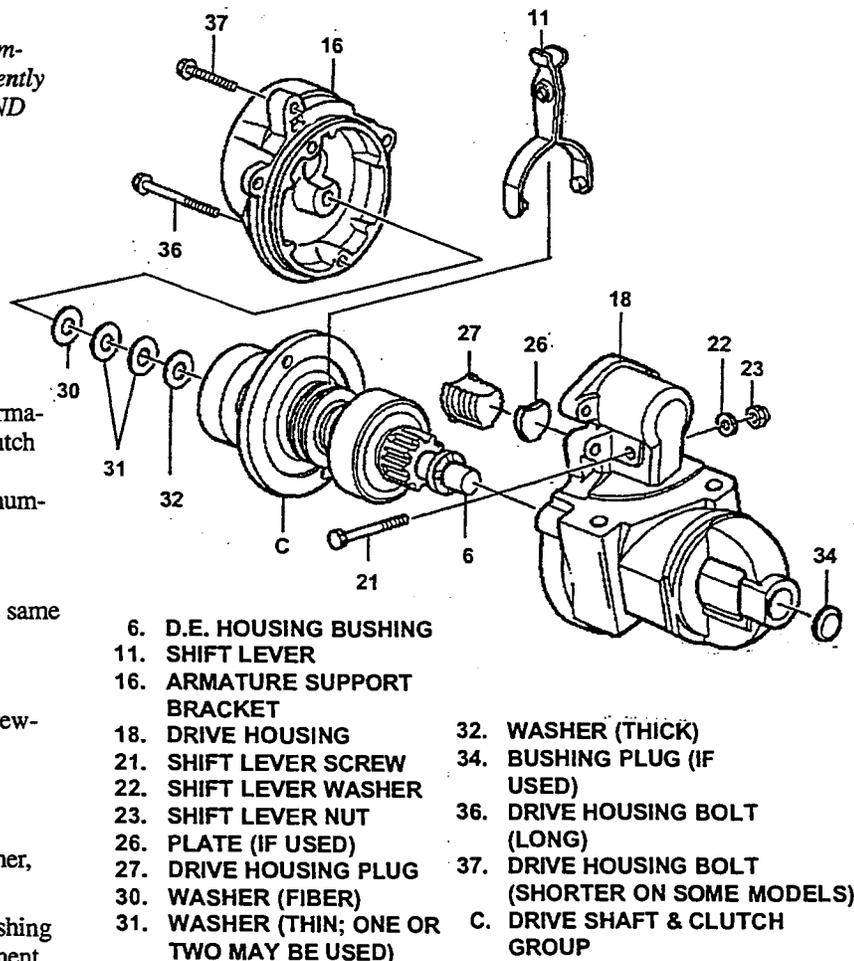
GEAR REDUCTION AND DRIVE GROUP
